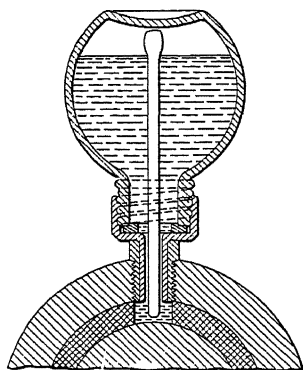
Typical bottle oiler, showing vertical pumping spindle. (Courtesy Pure Oil Company.)
